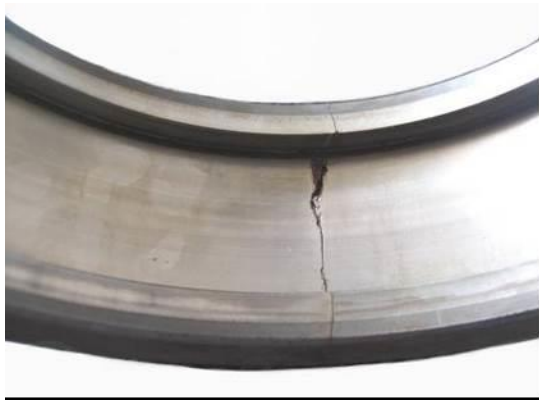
Cracks and breaks in bearing rings and rollers
